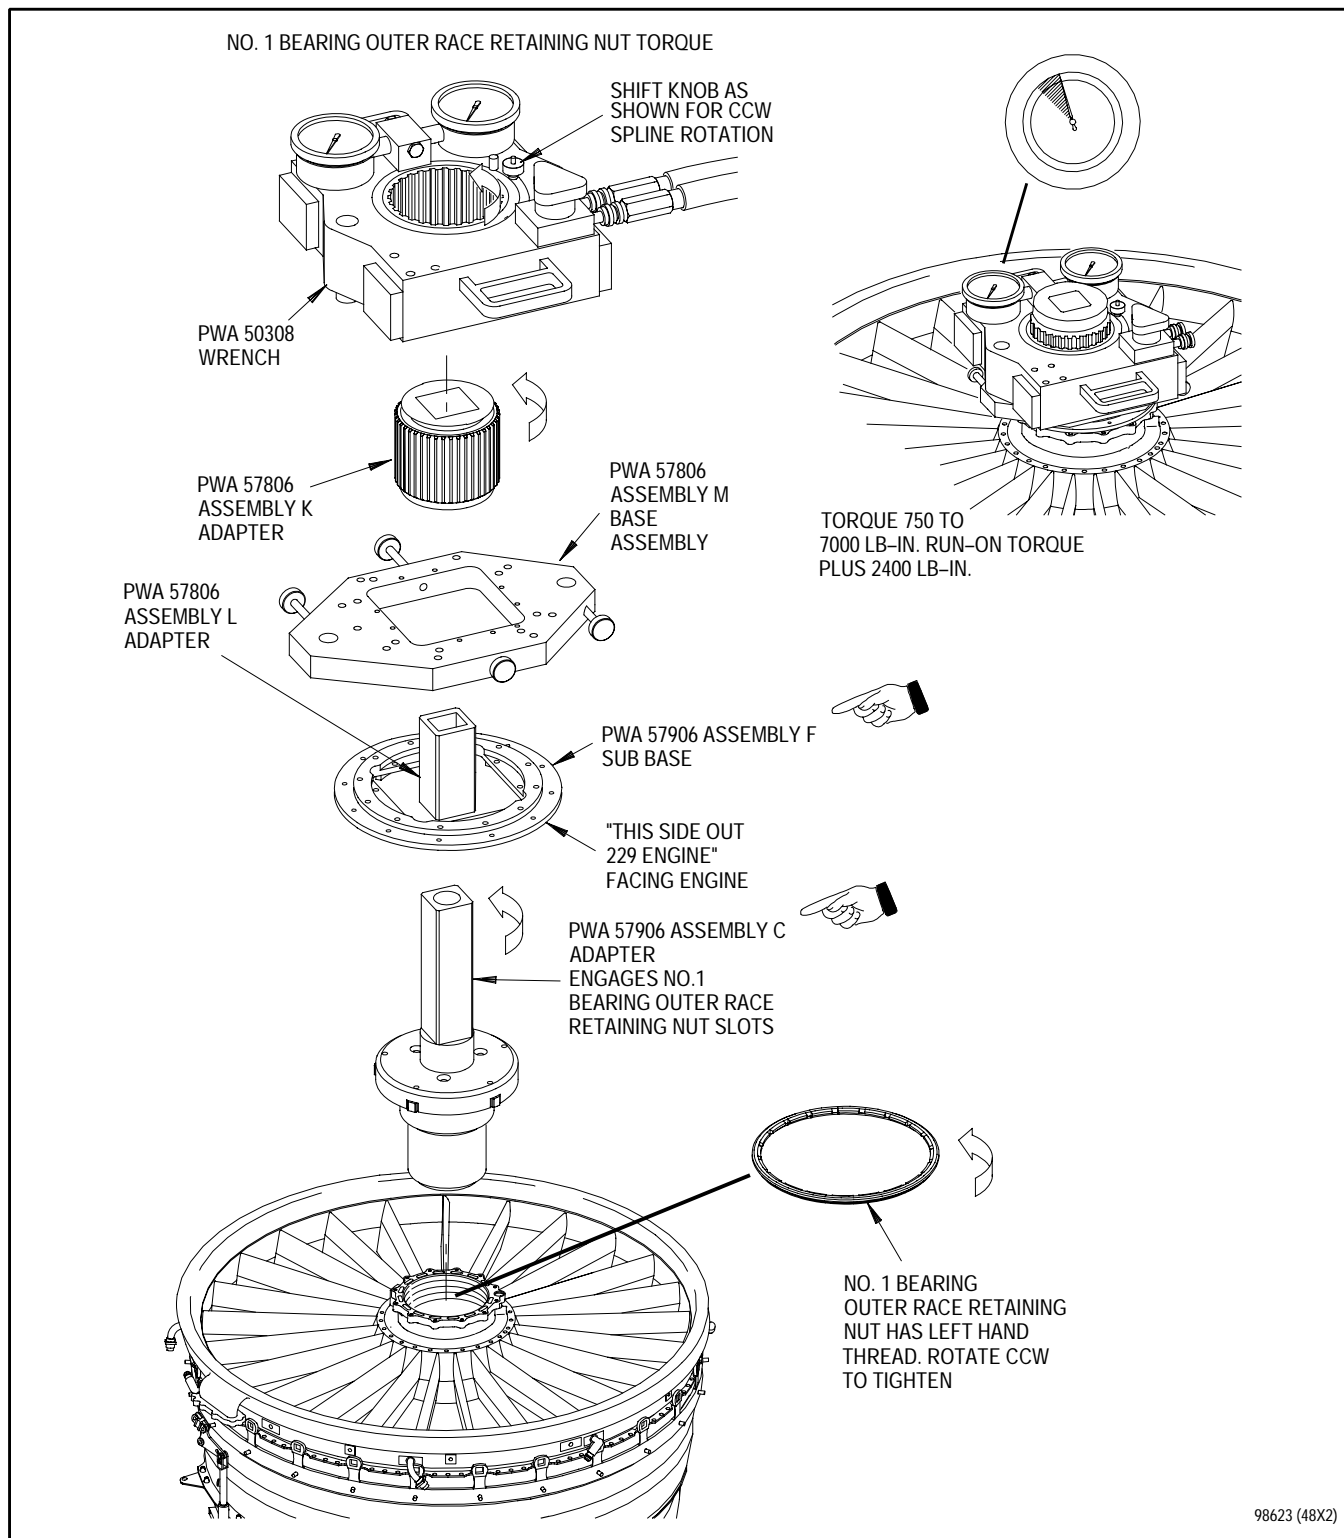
No. 1 Bearing Outer Race Retaining Nut - Torque
